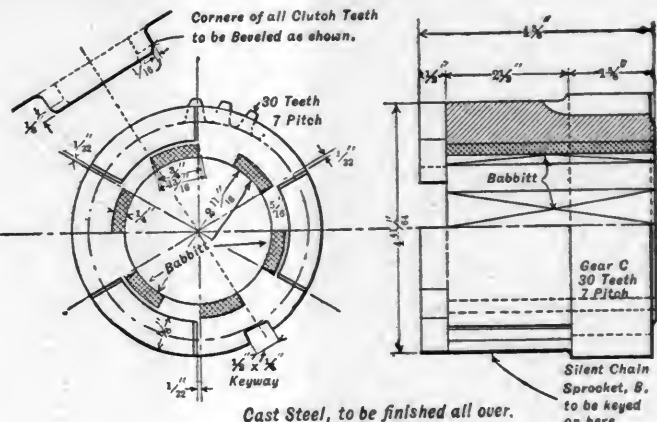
DETAILS OF THE SINGLE-JAW CLUTCH, TO CARRY SILENT CHAIN SPROCKET AND GEAR—C.
